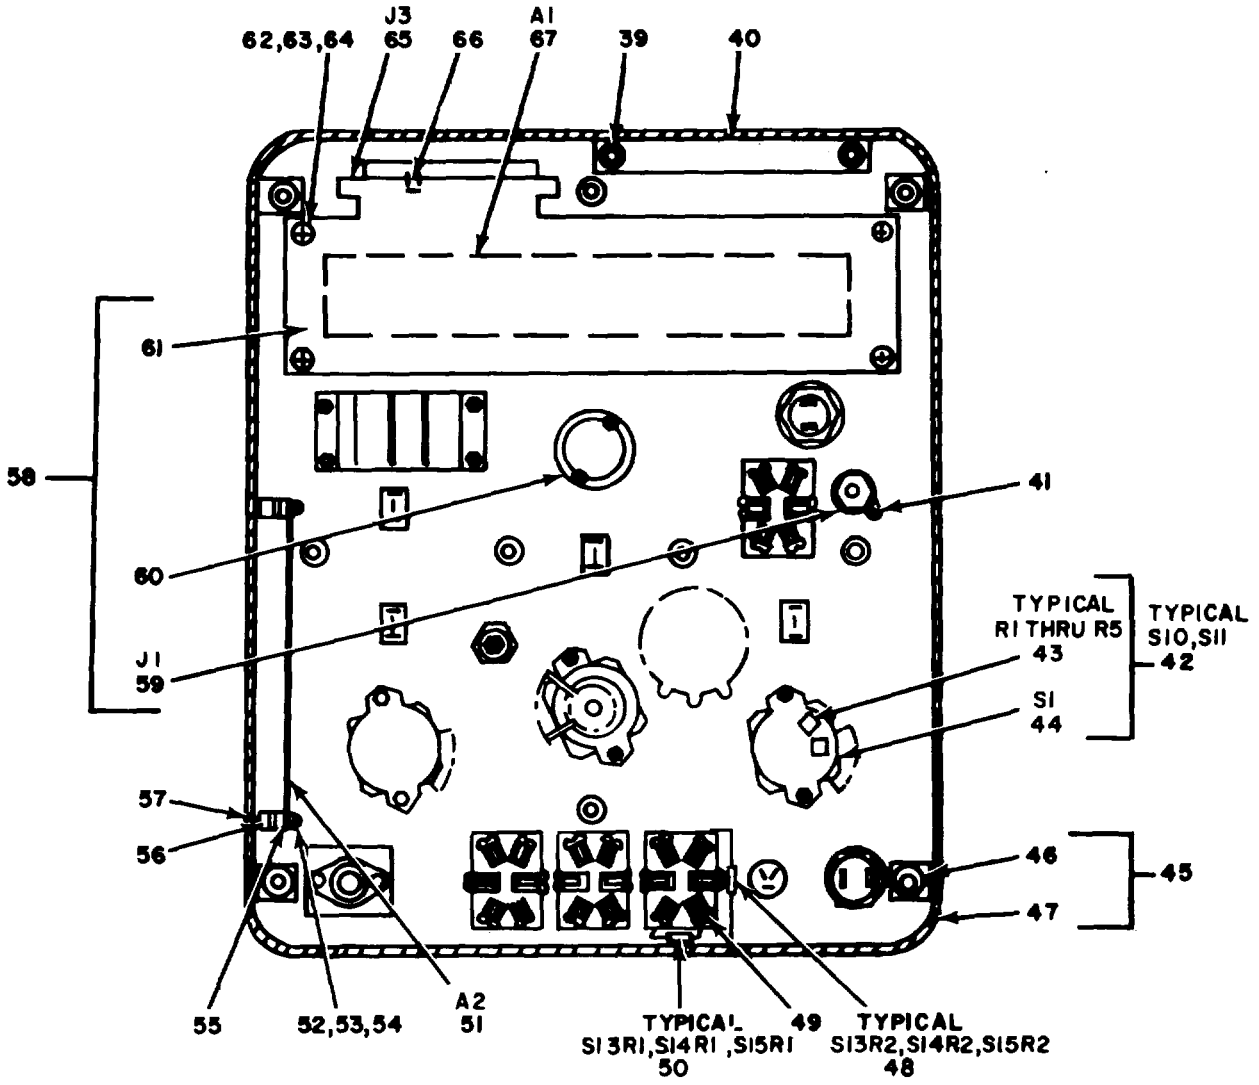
① Target Module Assembly (Sheet 1 of 1)
